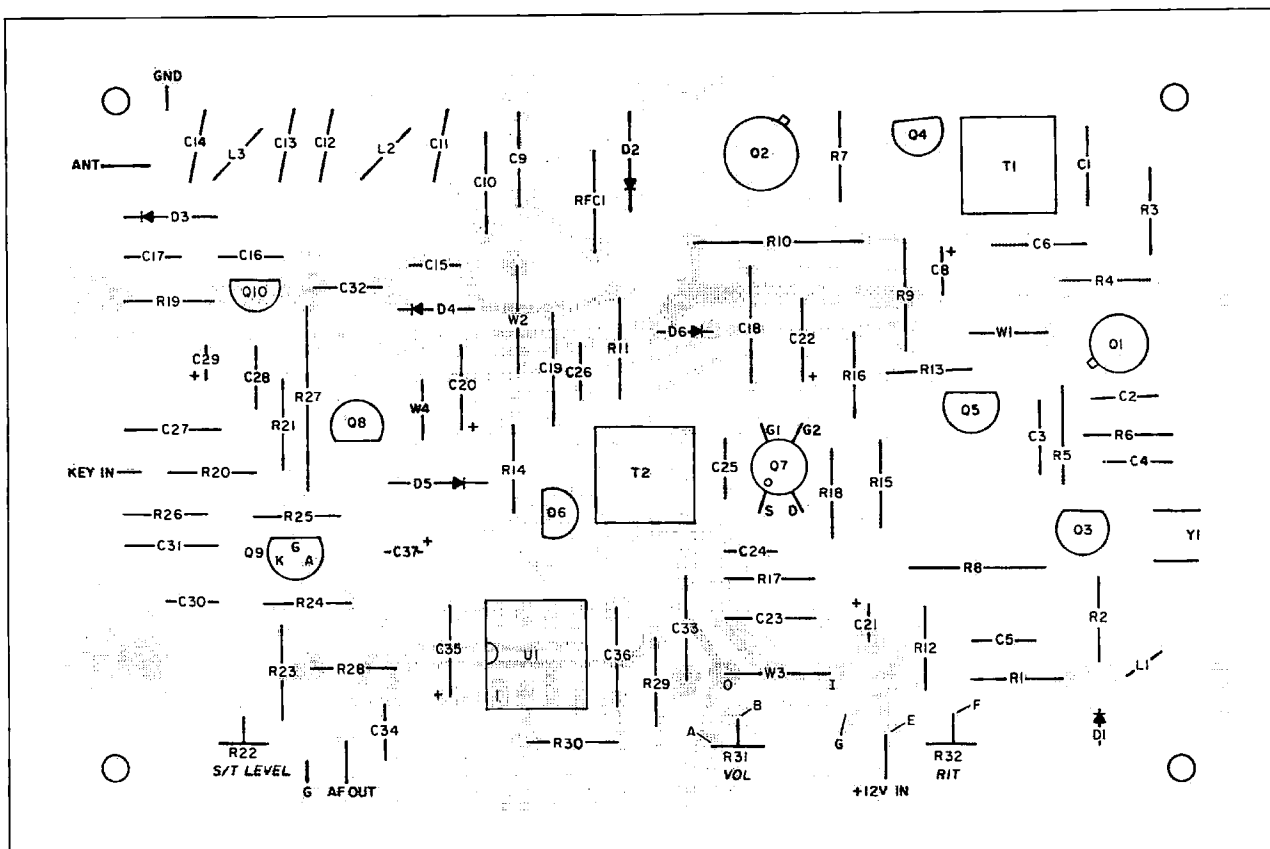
PC board parts placement. To disable the transmitter, remove wire jumper W2. Also remove R27 to lower sidetone pitch to normal with transmitter disabled.
